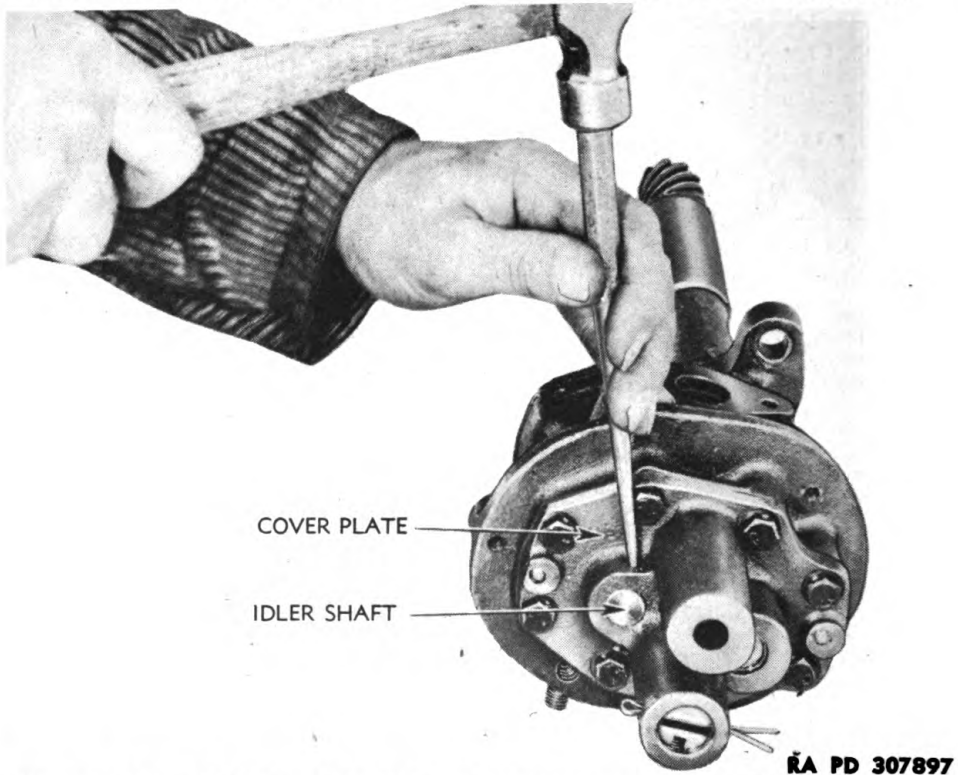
Driving Pin Out of Cover and Idler Shaft
